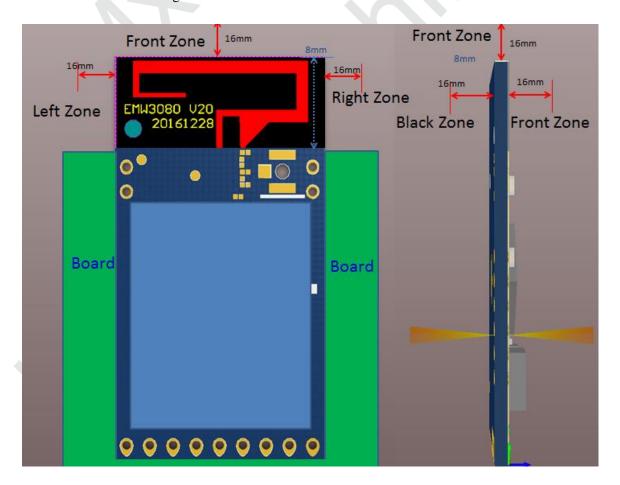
Minimum Clearance Zone of PCB Antenna (Unit: mm)
